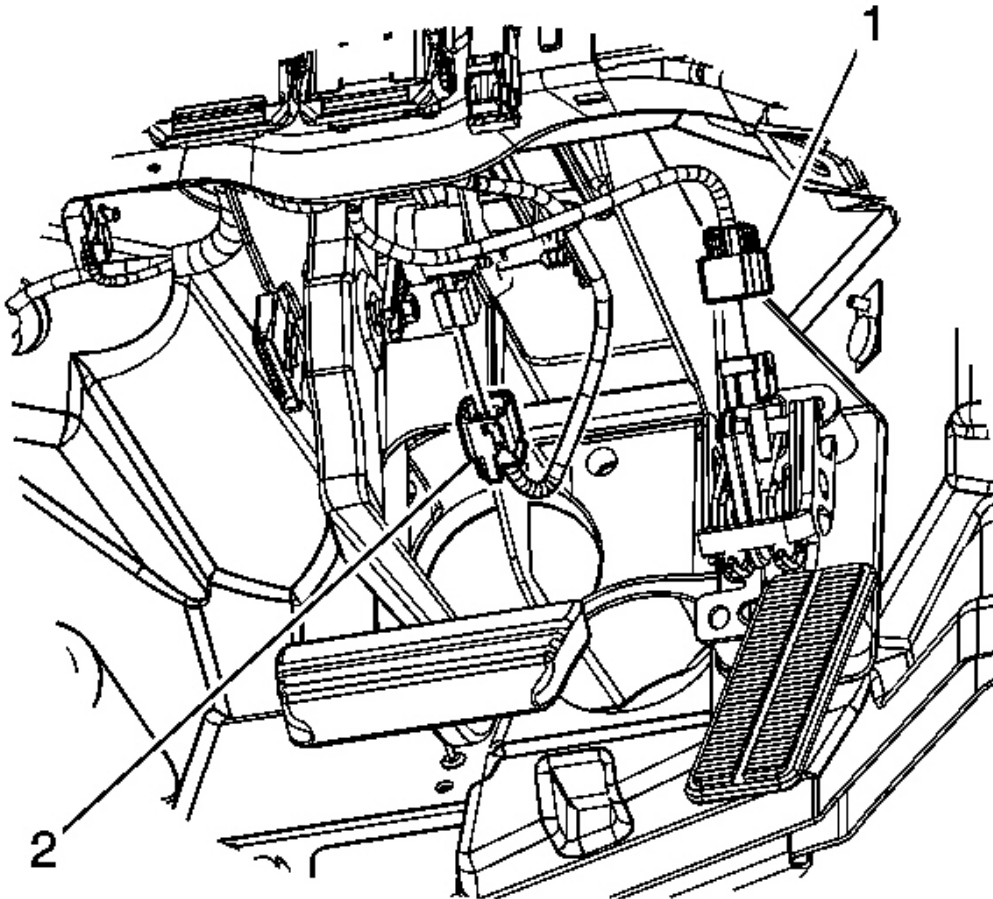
Accelerator Pedal Position Sensor & Brake Apply Sensor
